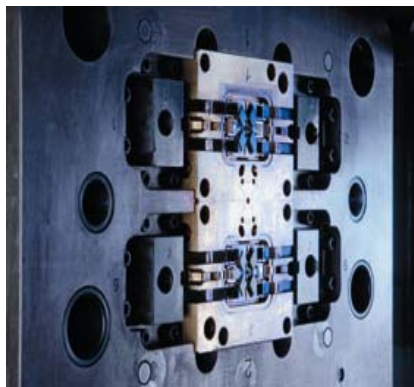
Pre-molded parts ready for being overmolded with PBT in the upper cavity of the machine
